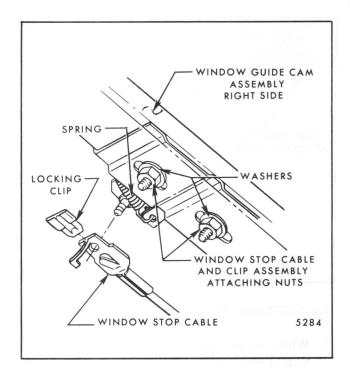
Window Stop Cable and Clip Assembly Attachment
